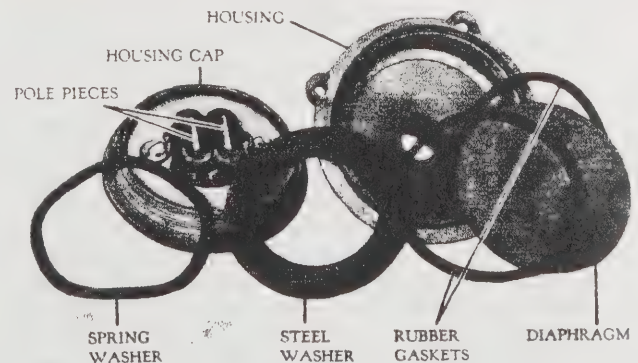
HORN TYPE UNIT, DISASSEMBLED.
